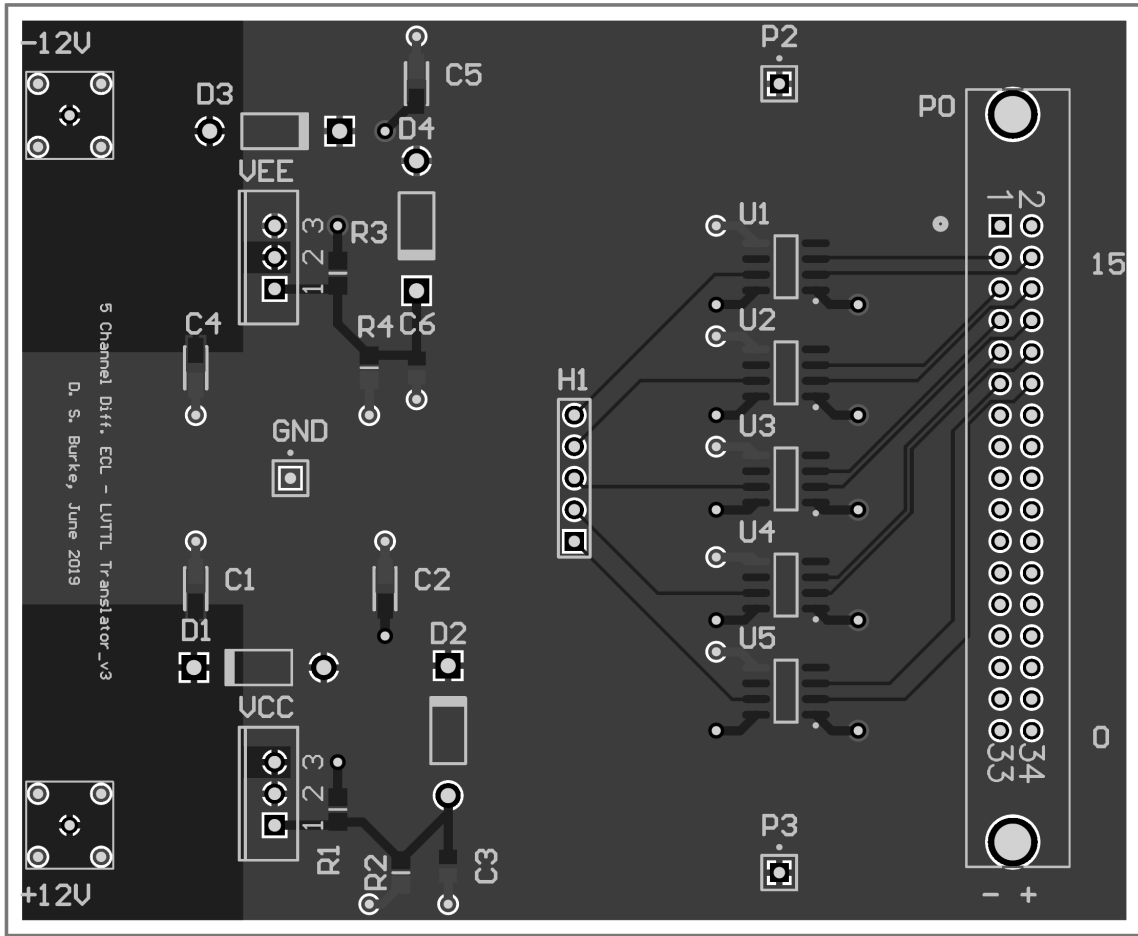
PCB layer for 5 channel Diff. ECL to LVTTTL translator.
